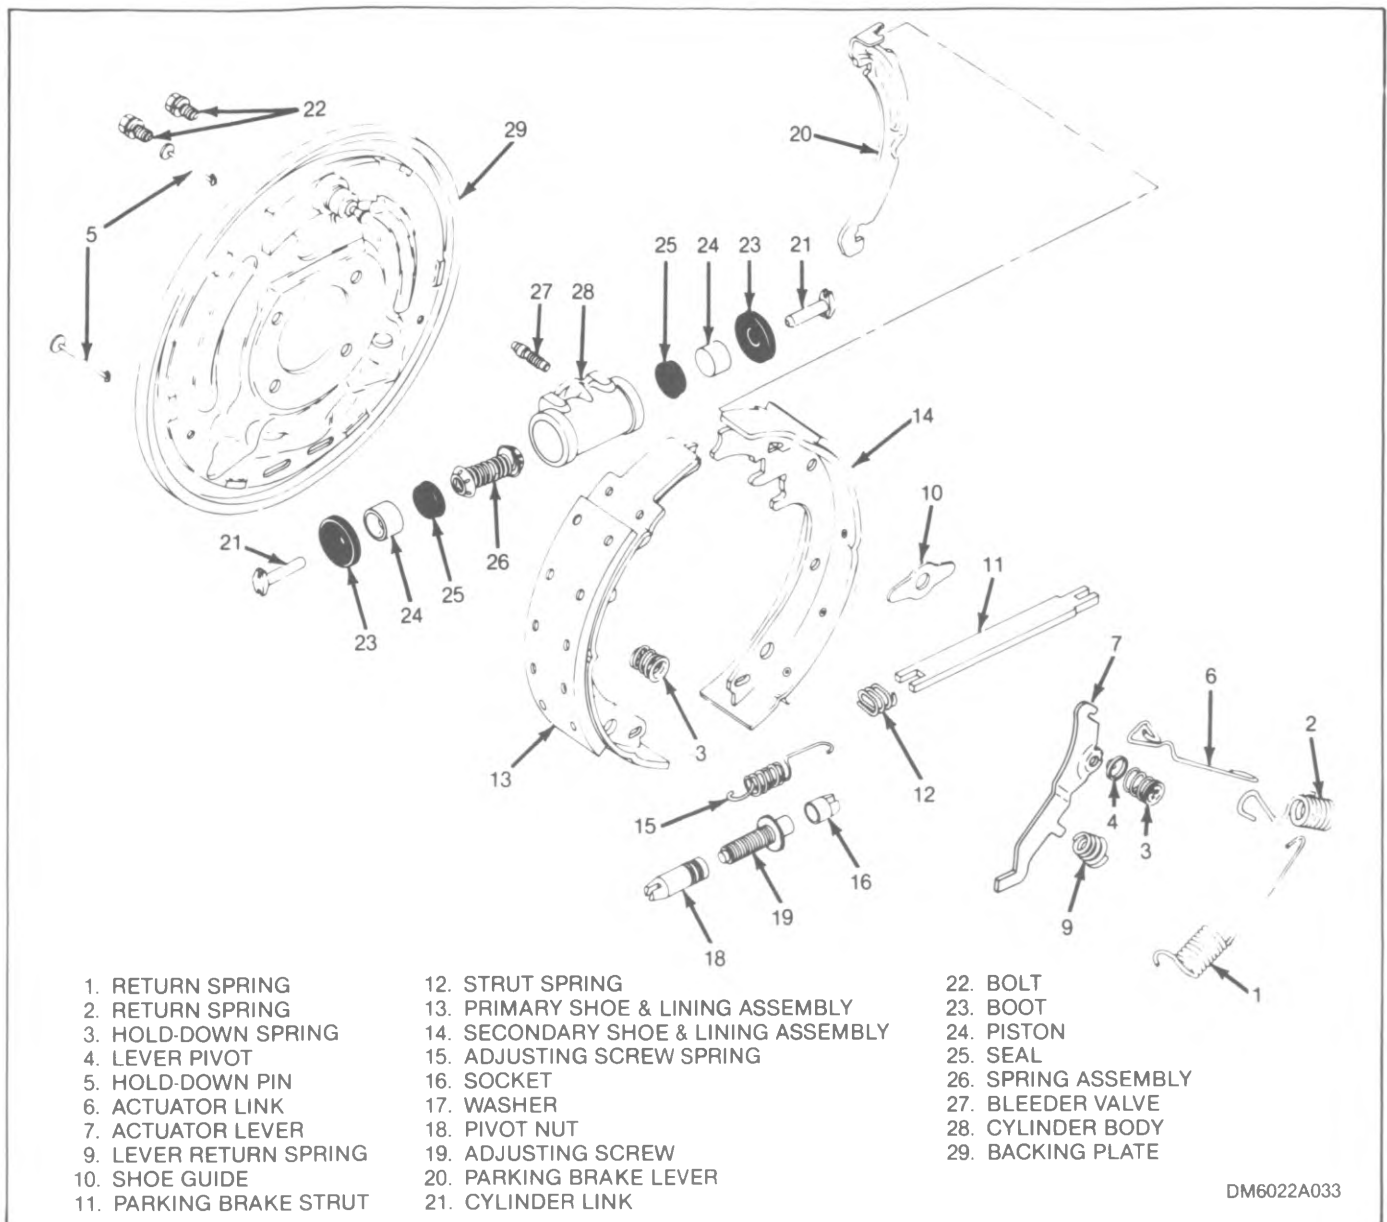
Conventional Drum Brake With Release Actuated Adjuster
